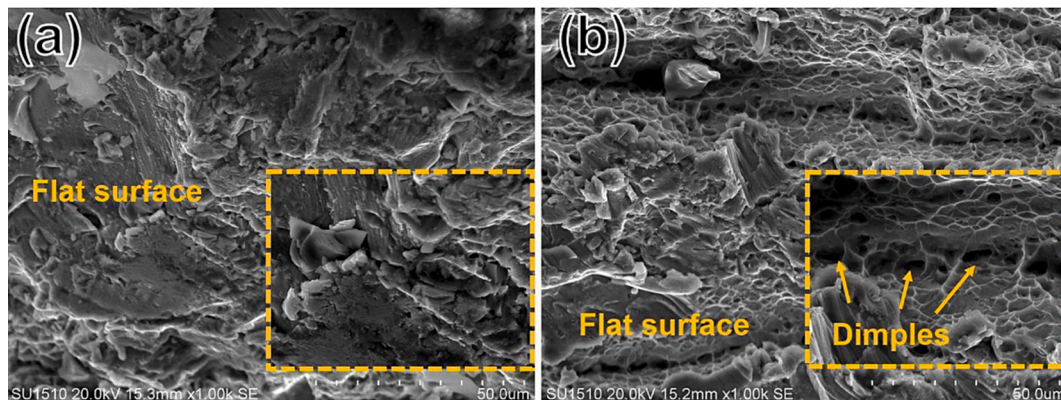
Fracture surface fractographs (a) Monotonic loading (b) Pulsating loading.
